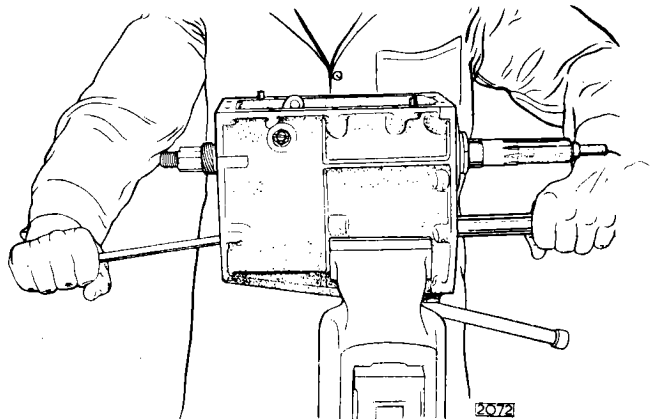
Lifting the layshaft into mesh and inserting the dummy countershaft
